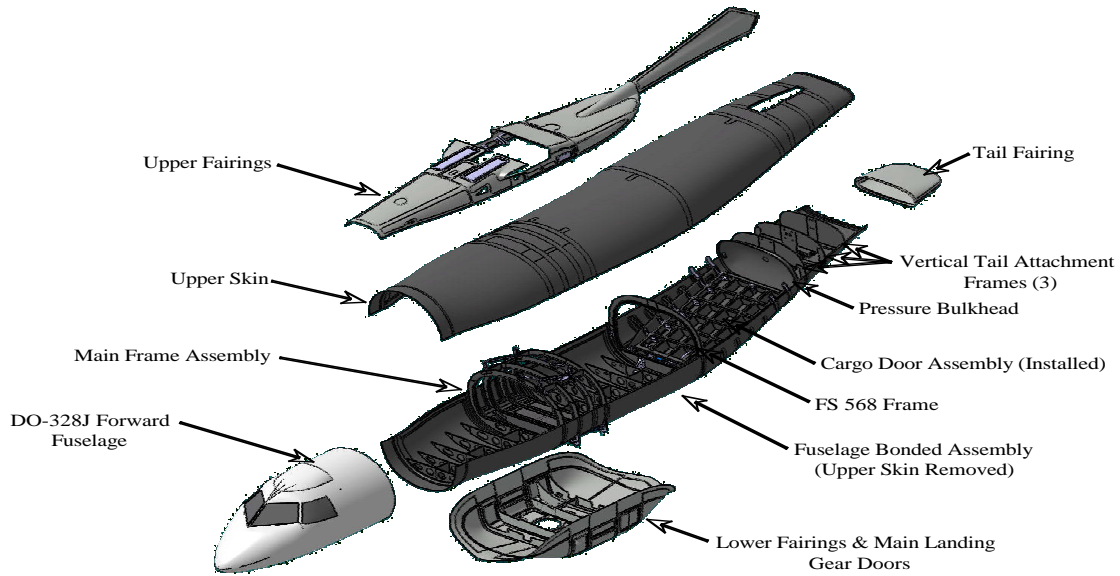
ACCA Fuselage Assembly (Zelinski, 2010)
